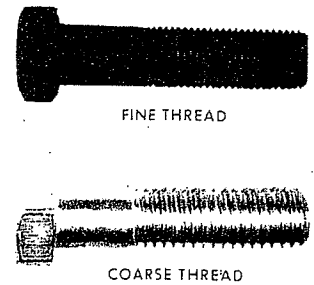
Fine- and coarse-threaded fasteners must not be used together.
